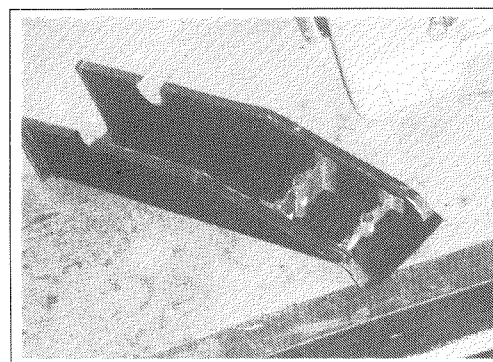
Align the anti-crush brackets with the holes and weld into position.
